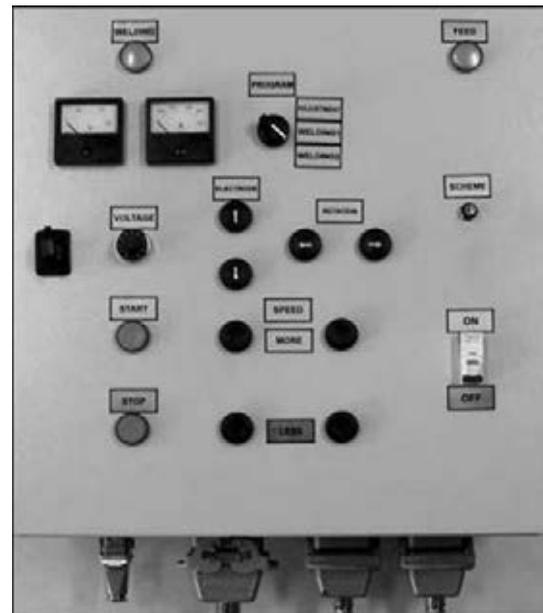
Appearance of control panel of ADSP-200 automatic machine
